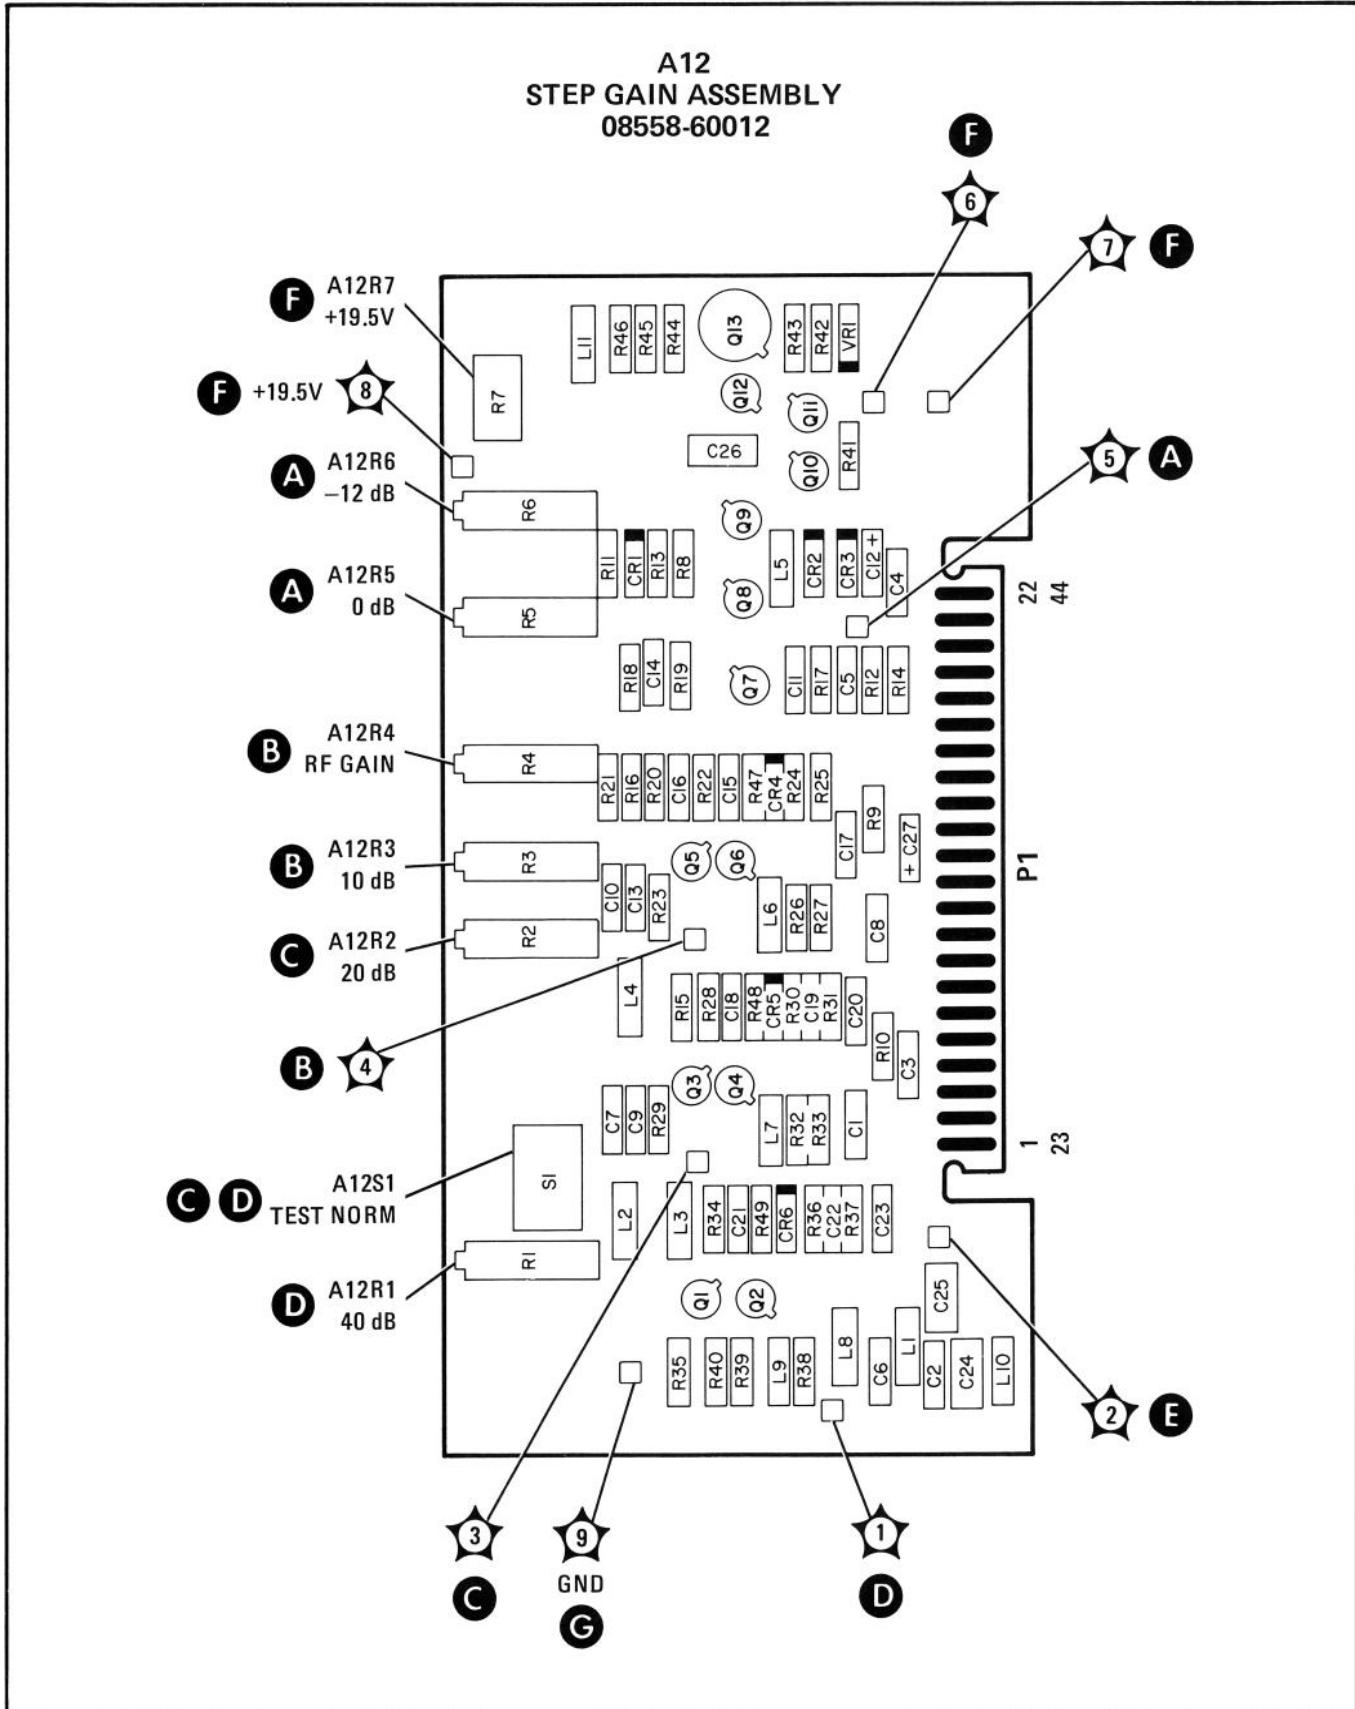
A12 STEP GAIN ASSEMBLY, COMPONENT LOCATIONS
